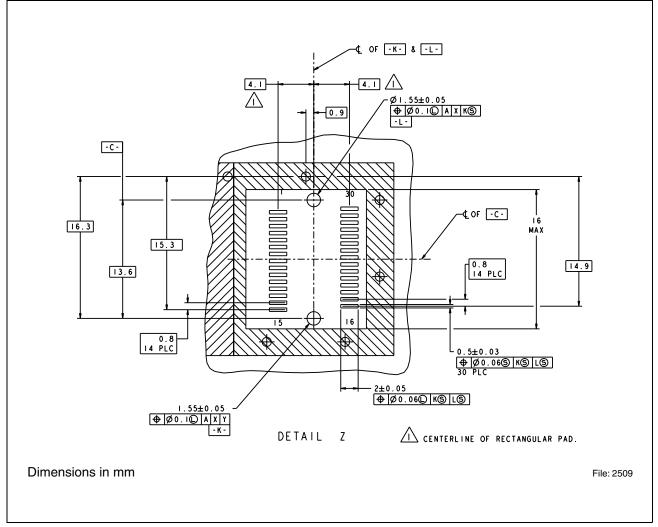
XFP Host Board Mechanical Layout, Detail Z
